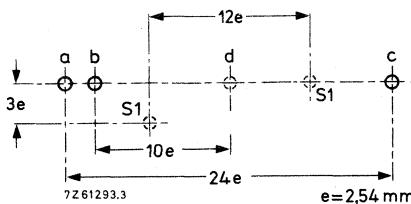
Hole pattern in the printed-wiring board for a single potentiometer (viewed on component side).
